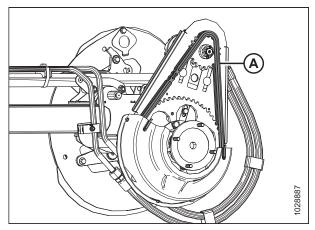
Drive Chain - Double-Reel Drive Shown
